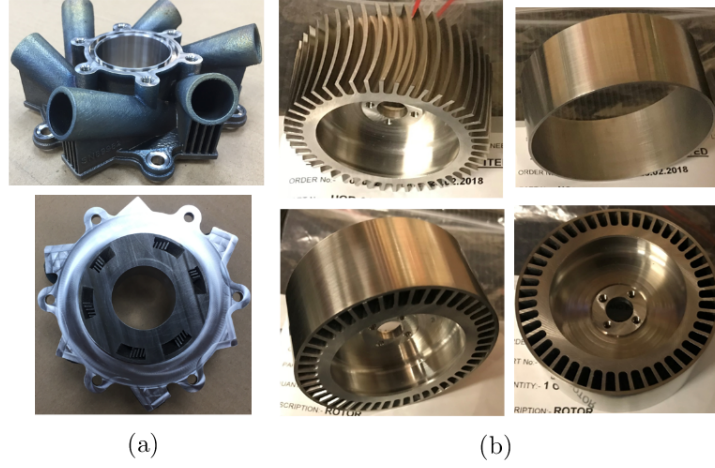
Manufactured parts: (a) inlet on top and outlet stator on the bottom. (b) Rotor showing channel curvature and its outer sleeve.
